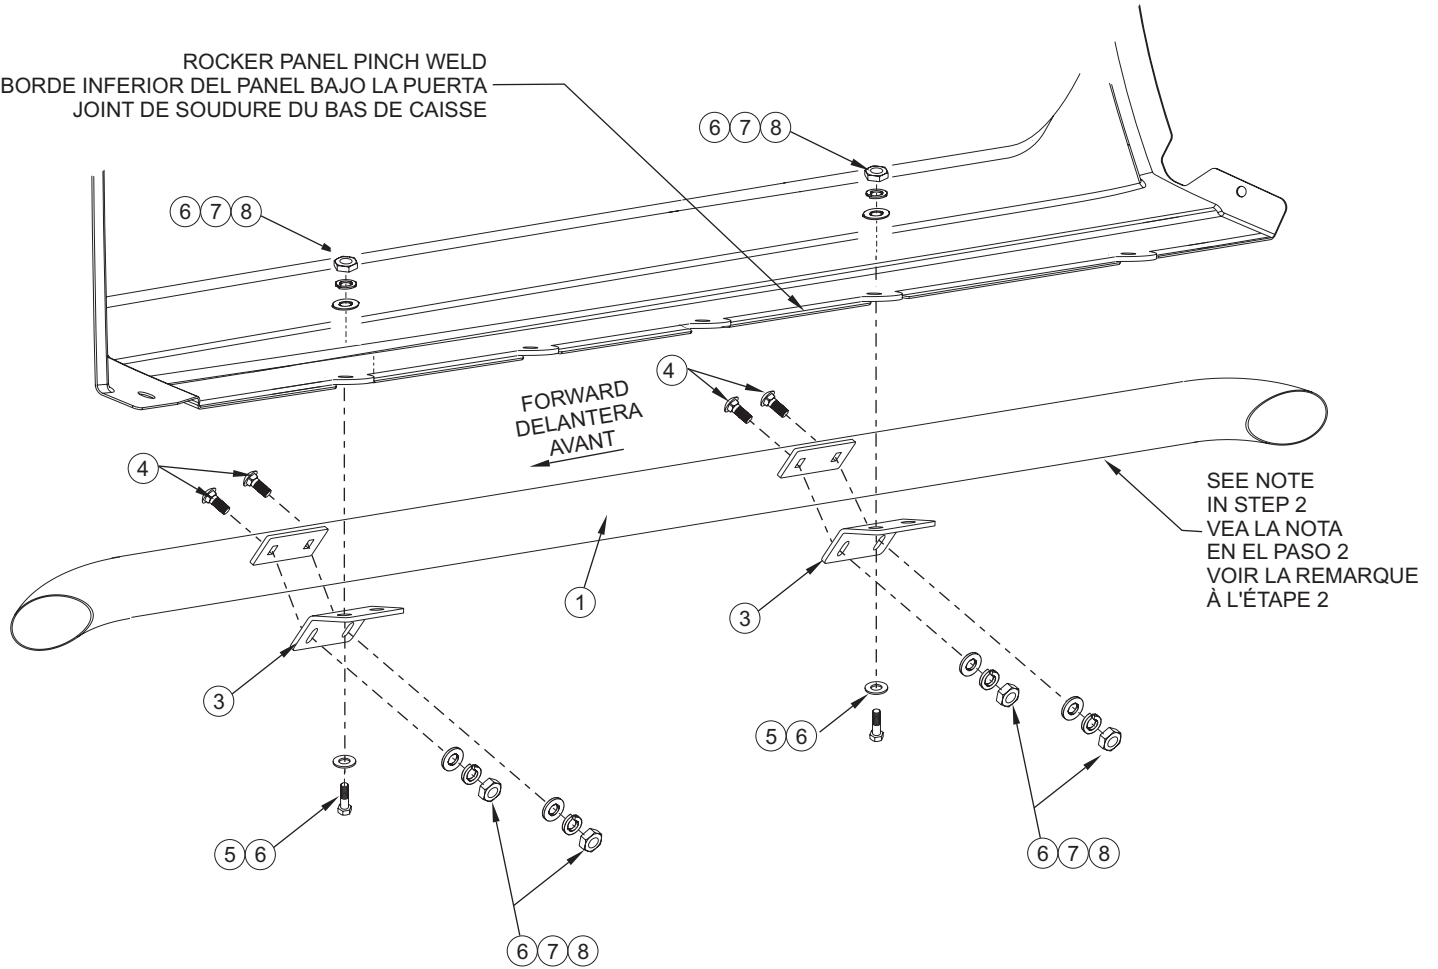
PASSENGER SIDE SHOWN, DRIVER SIDE OPPOSITE
